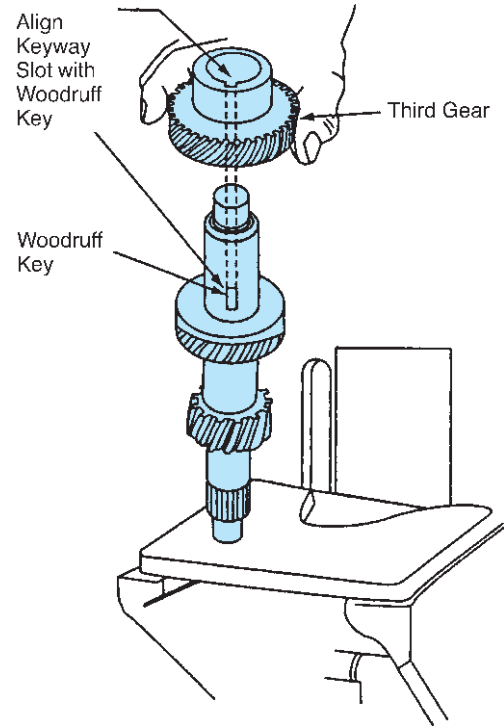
Third gear should be aligned with the key before pressing it onto the TR-3550 cluster gear. (Courtesy of Transmission Technologies Corporation, TTC)
